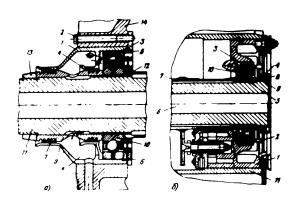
; - Axial Flow Compressor Engine Aurbine Front and
